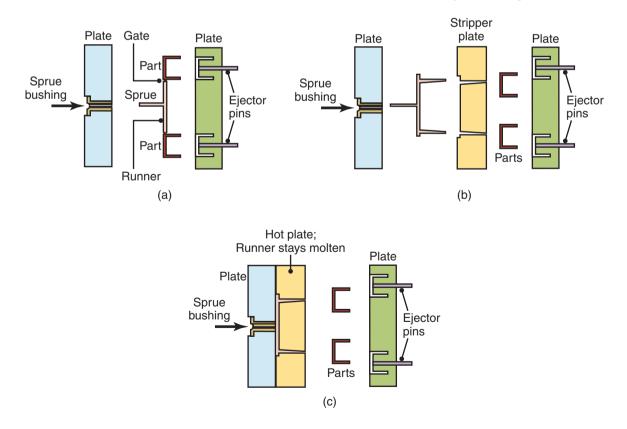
Types of molds used in injection molding: (a) two-plate mold; (b) three-plate mold; and (c) hot-runner mold.
